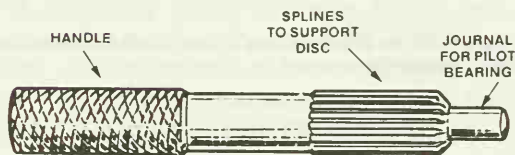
A clutch disc alignment tool. (Buick Motor Division of General Motors Corporation)
